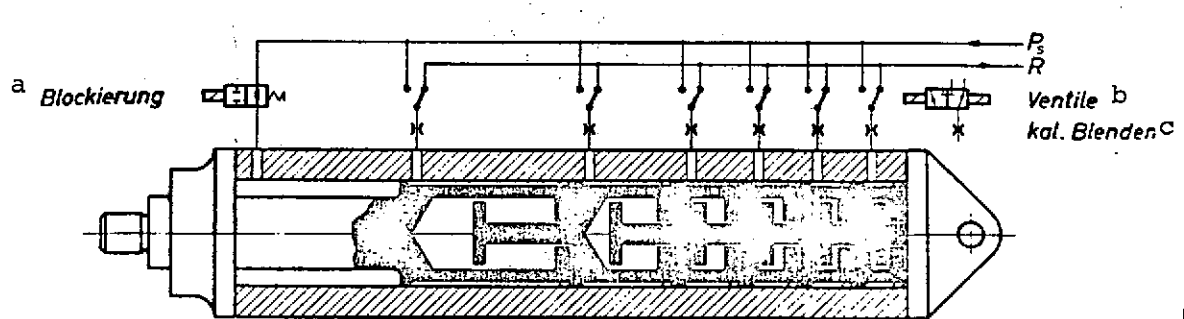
Schematic design of a digital electro-hydraulic actuator with locking valve.
